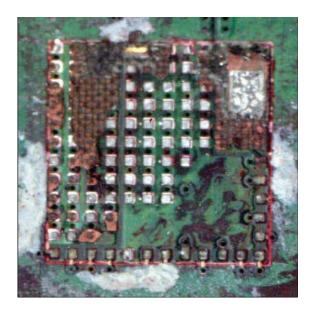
Dye and Pry Testing: Very Strong Solder Joints
